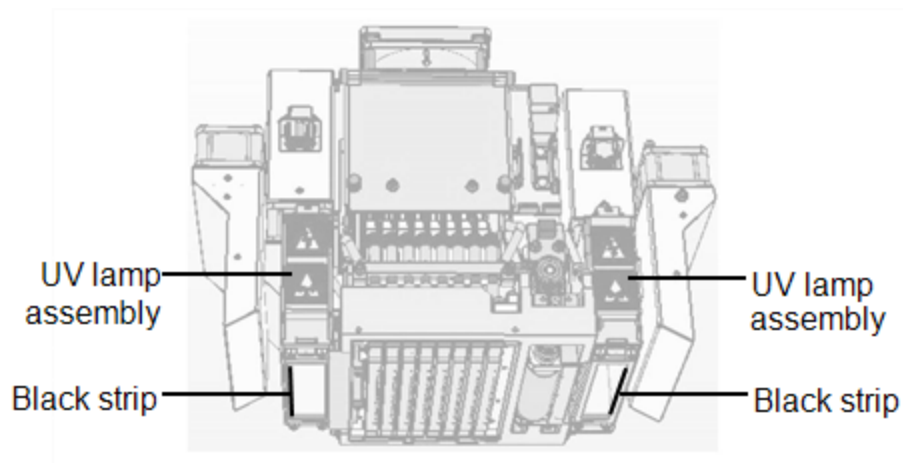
Print block and UV lamp assembly, showing correct placement of black strip
